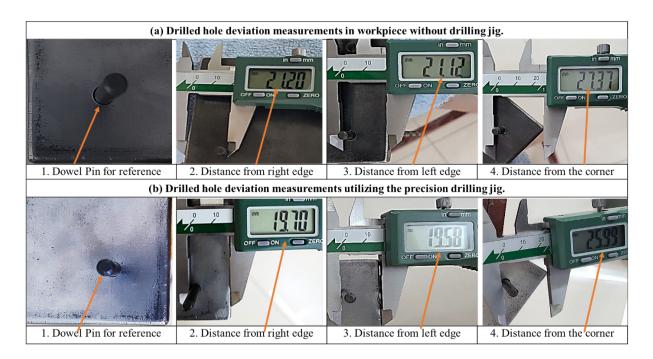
Location measurement of drilled holes, drilled with and without drilling jig.
